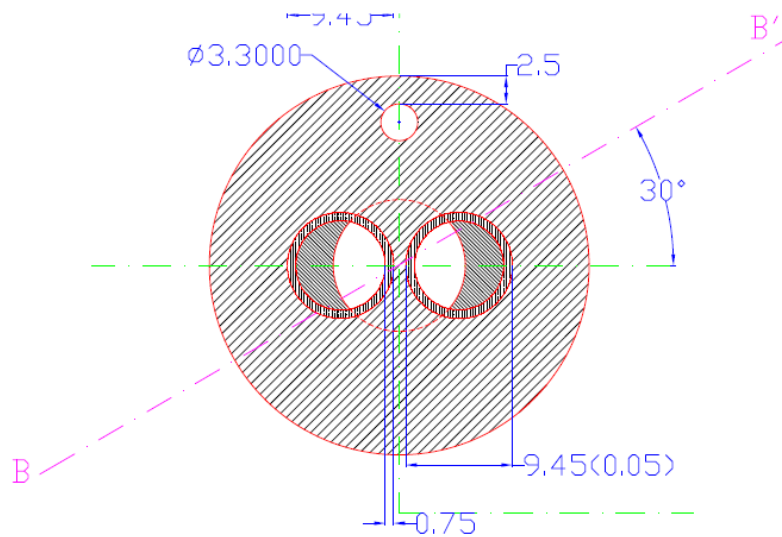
Cut plane 2 of the cavity body front view (cut from the vacuum line)
